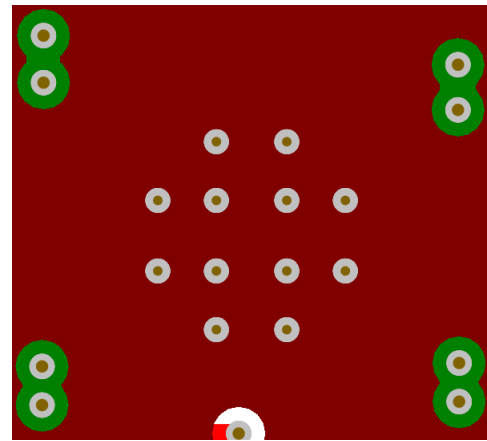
PCB Layout Example for LMK1D2106L, GND Layer
